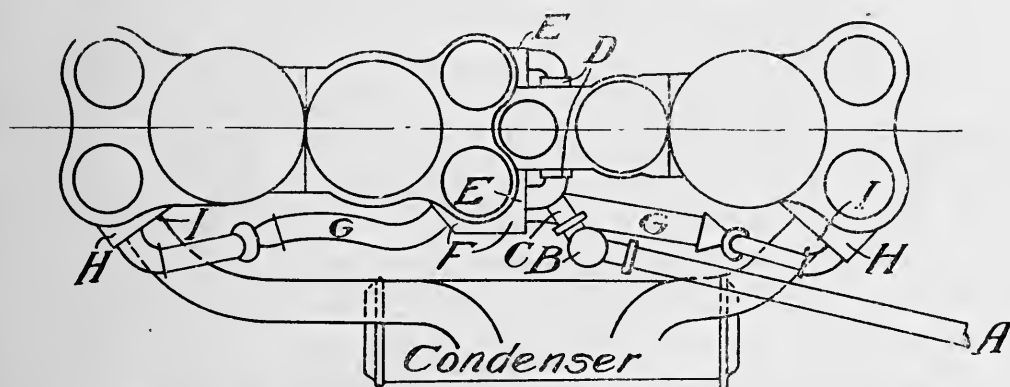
Sketch Arrangement of Steam, Receiver and Exhaust Piping.
